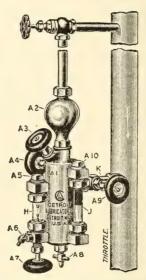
EXTERIOR VIEW DETROIT LUBRICATOR.
